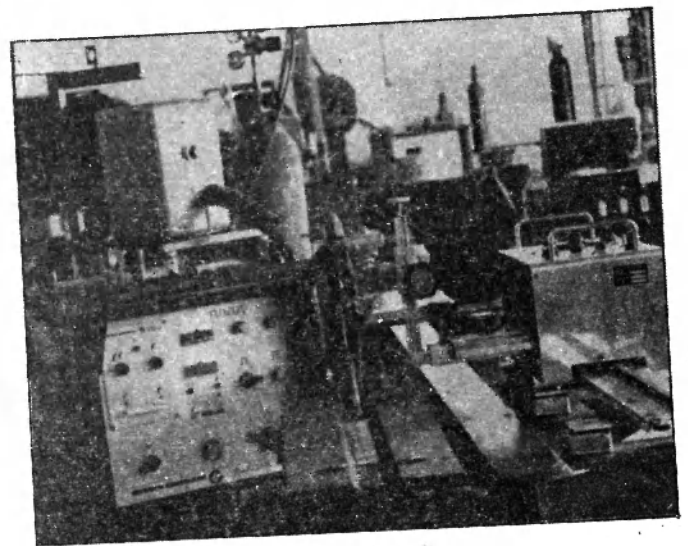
MIG/MAG welding unit and devices, Messer-Griesheim Pulsomat 450 and BUG-O-matic oscillation unit
